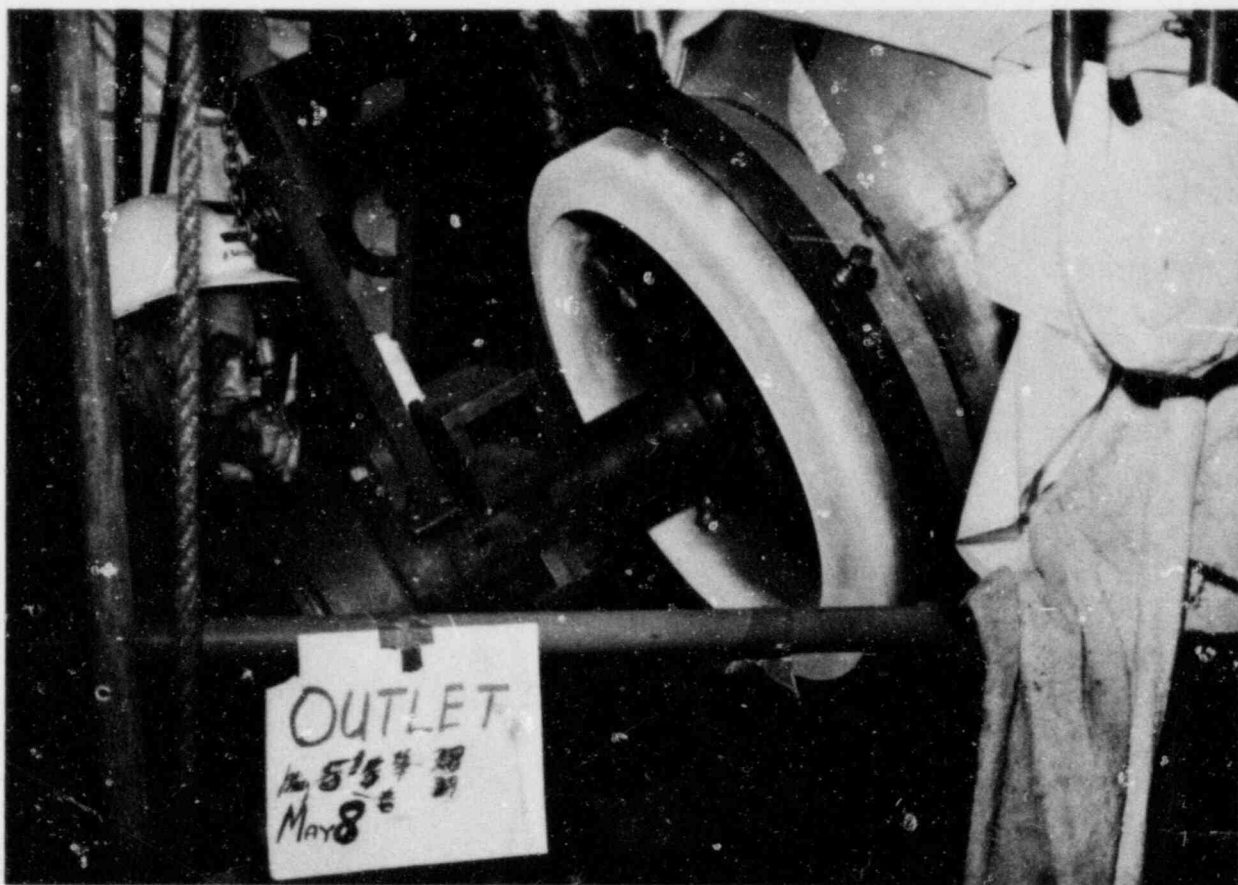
CUTLET NOZZLE - LIQUID PENETRANT EXAMINATION AFTER MACHINING.
